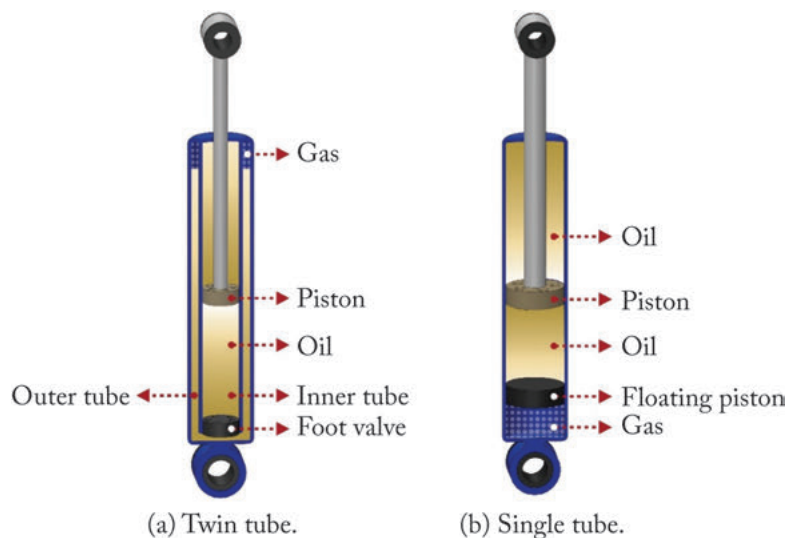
Shock absorbers: (a) twin tube and (b) mono tube.
